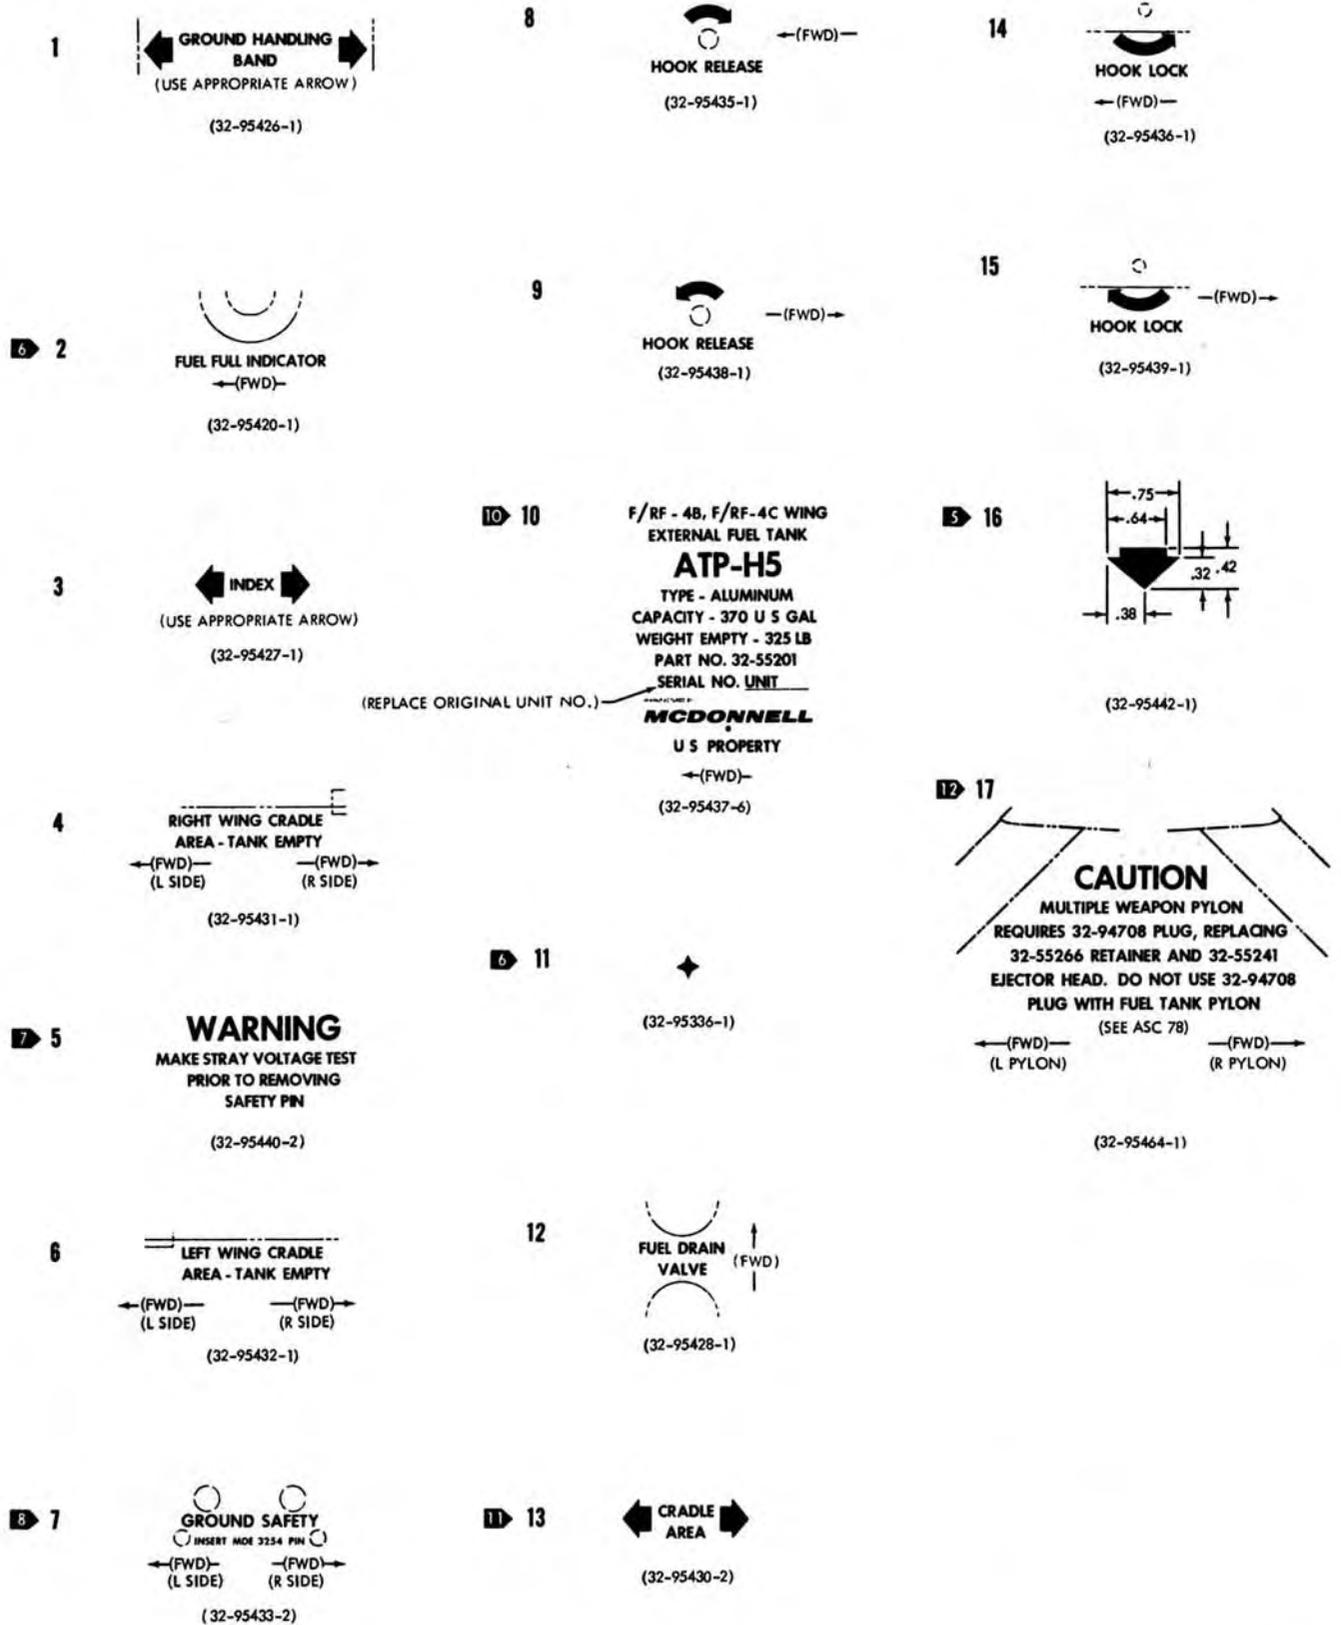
Wing External Fuel Tank and Pylon Markings (Sheet 3)
